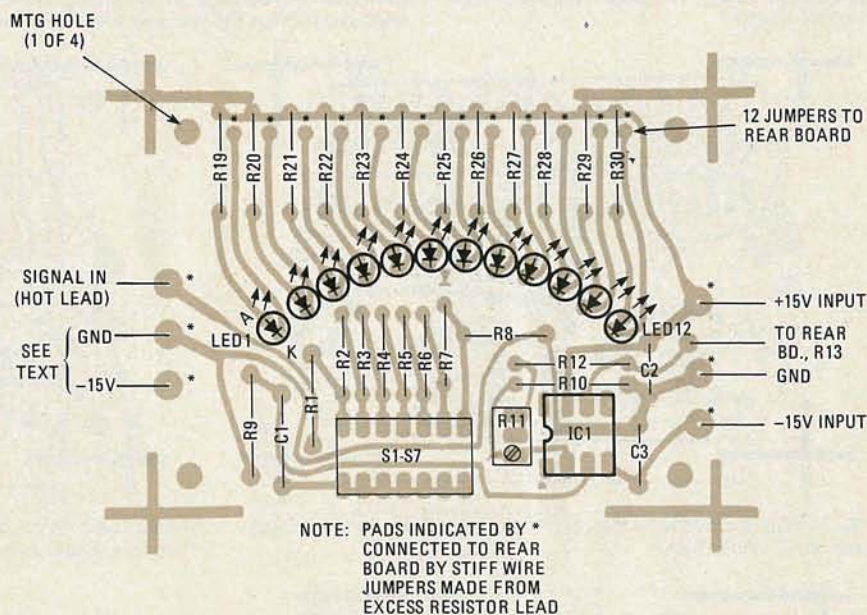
PARTS LAYOUT for the front circuit board. Check the polarity of all LED's before installing. On the types specified, the cathode terminal lead is shorter than that for the anode.
